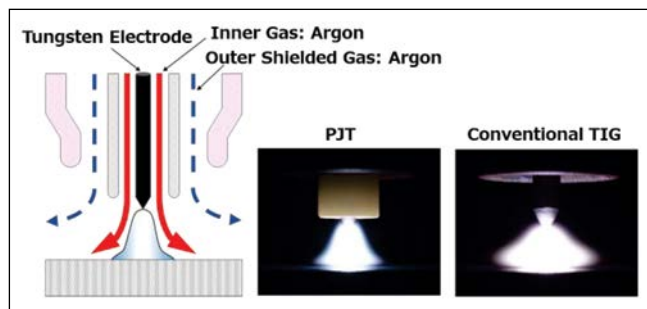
Plasma Jet TIG (PJT) welding.
